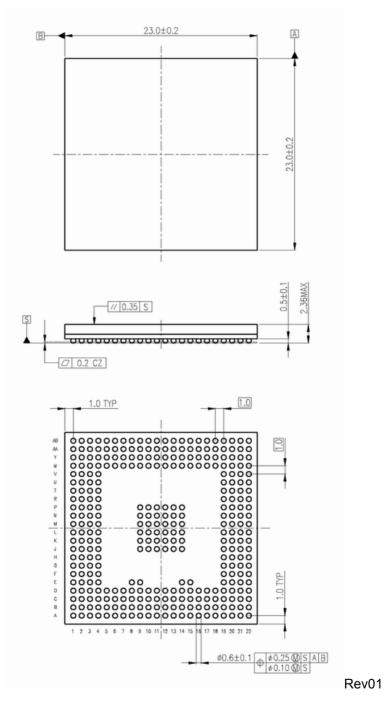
BGA328 Package Dimensions: Top View, Side View, and Bottom View
